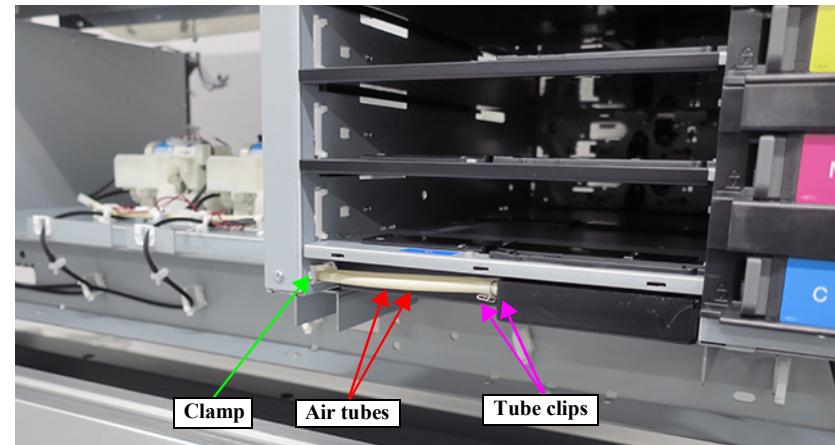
Removing the INK HOLDER RIGHT (6)
